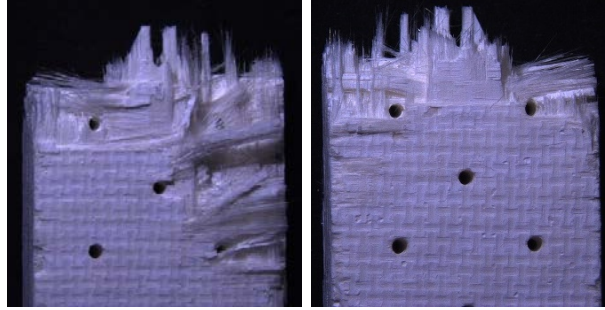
Fracture surfaces obtained for an N720/A specimen with diamond-drilled holes tested in tension to failure at 1200°C in air ($\epsilon_f = 0.42\%$)
